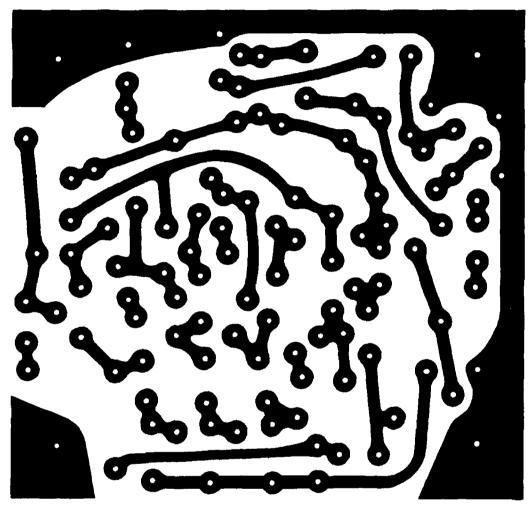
Printed-circuit layout for the improved fm receiver scanner. Component layout is shown in fig. 4.
